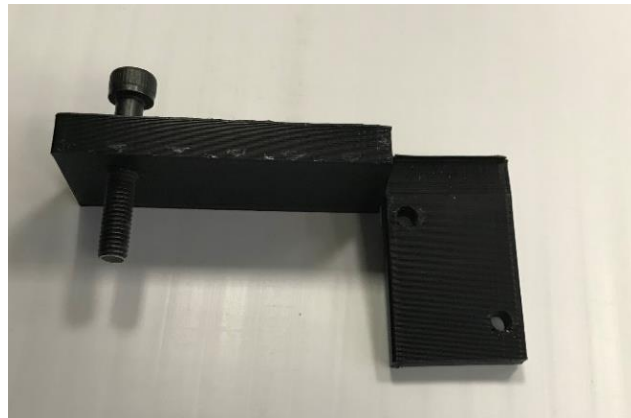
Design of 3-D printed z-lock (piece G).
